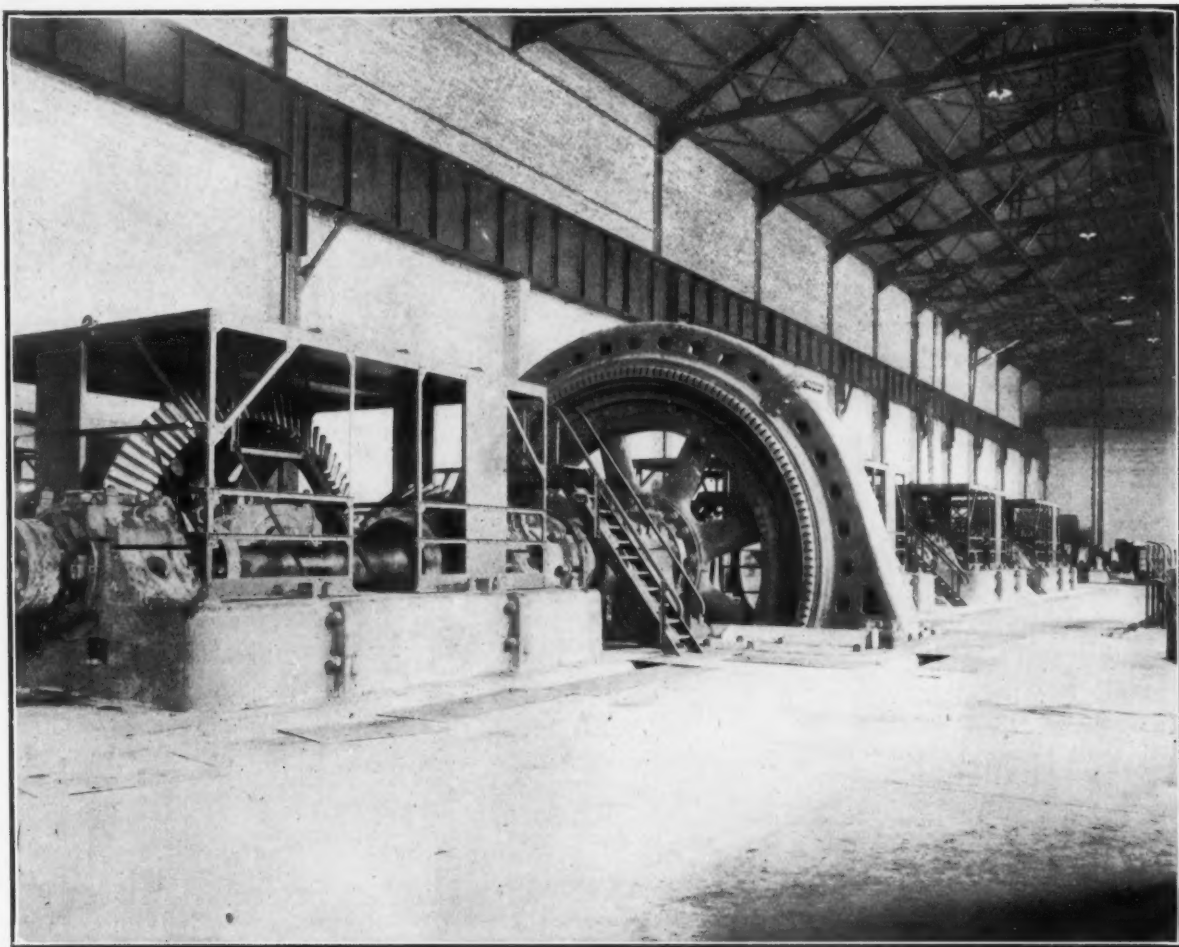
Bevel Gear Driver of the 32-Inch Blooming Mill.
